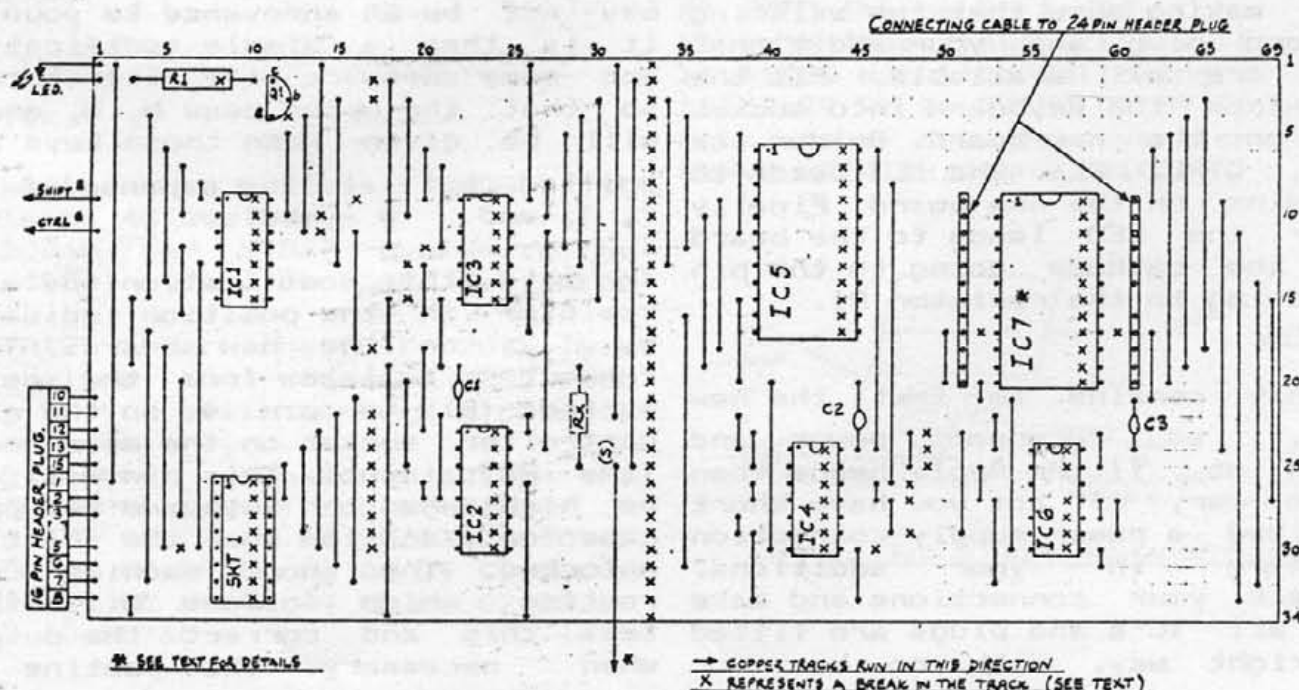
ZERO BOARD WIRING LAYOUT (BOTH CIRCUITS)
